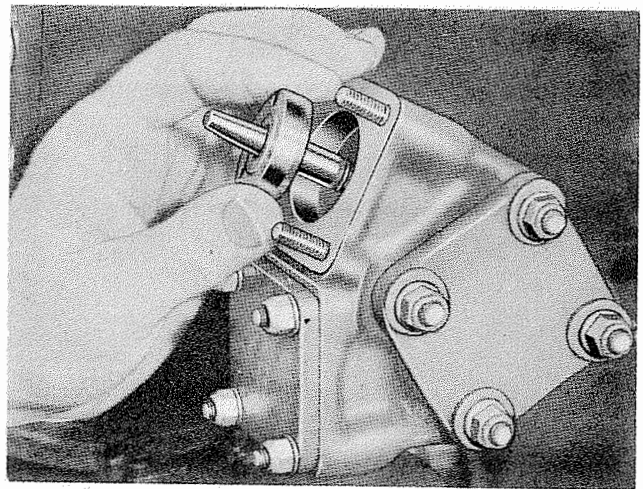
Installing Tachometer Drive Shaft Oil Seal and Retainer
